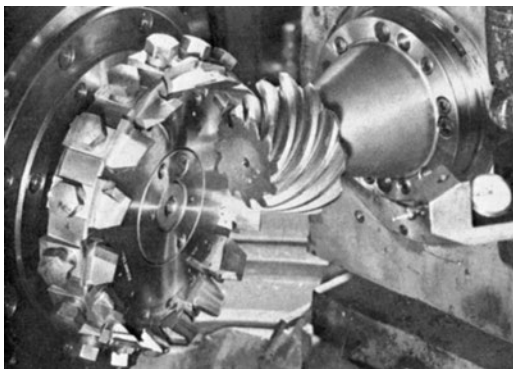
Spiral gears up to approximately 1.25 m (50 in.) in diameter are generated on machines employing circular face-mill cutters. (Courtesy of Gleason Works, Rochester, New York.)
